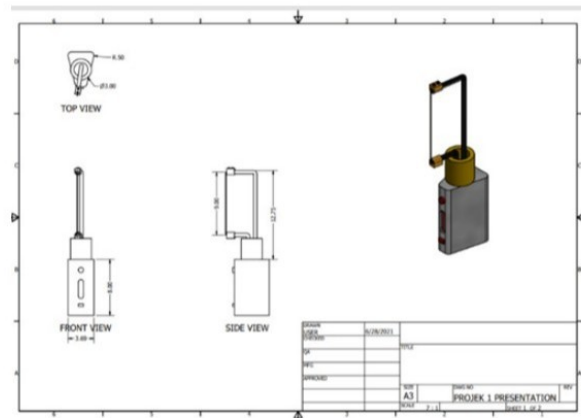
shows inventor section of Flash Cutter sketch
